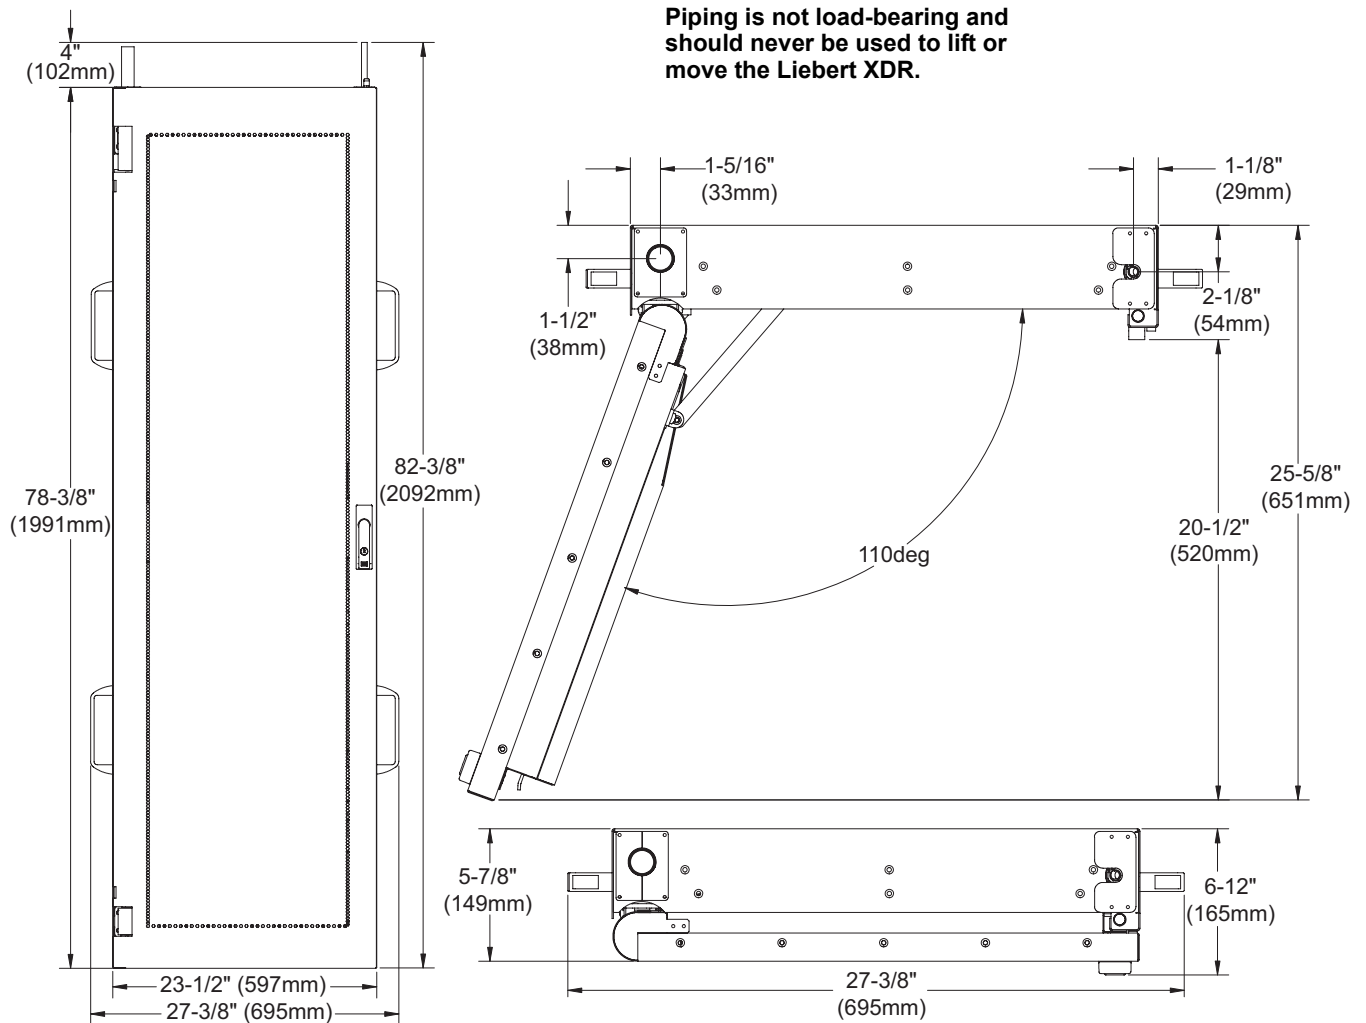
Overall dimensions with one-shot coupling (pre-charged)
